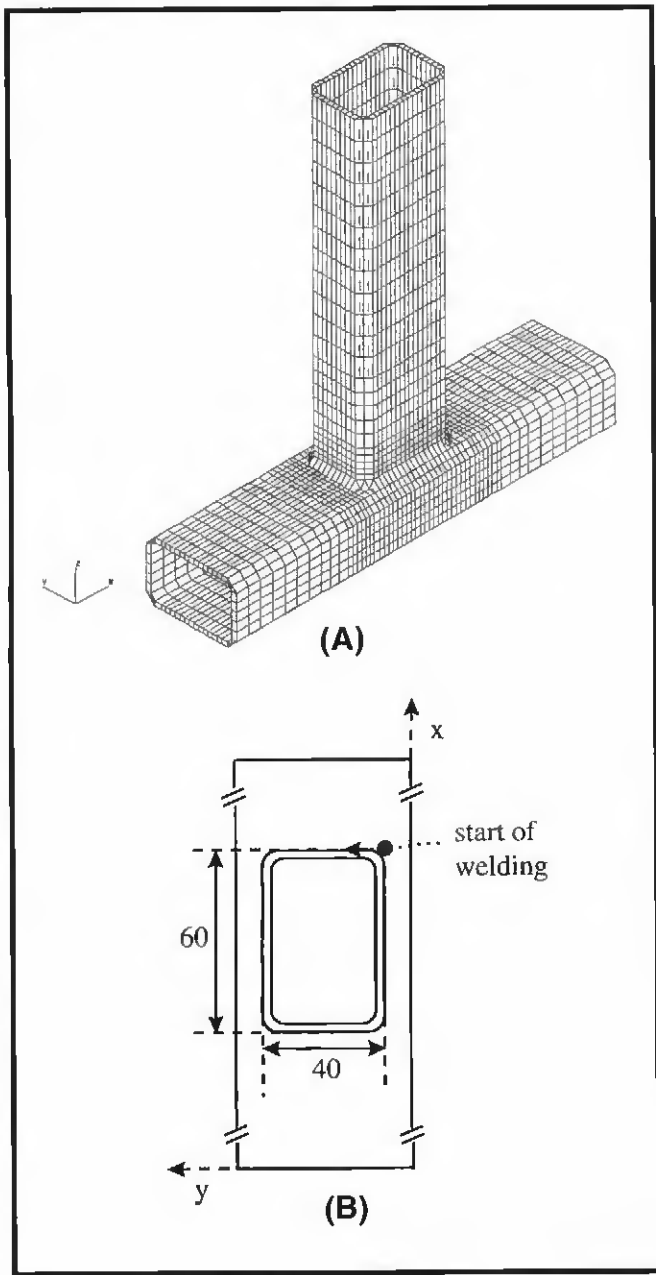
Geometry of hollow extrusion profile; A — details of element mesh; B — cross section at the upper horizontal surface of the extrusion at  $z = 0$  showing the start position of the weld. (All dimensions in mm.)
